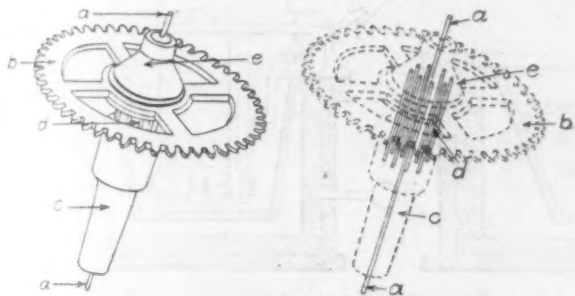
One of the Best Examples of Work Done with Die-Casting Machines.
